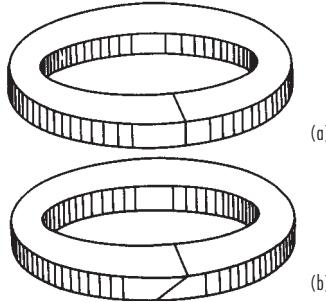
Butt (a) and skive (b) joints for compression packing rings.
